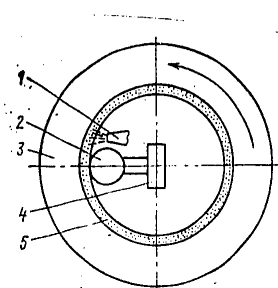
Diagram of a cut made by a disc with inside diamond-containing cutting edge.
